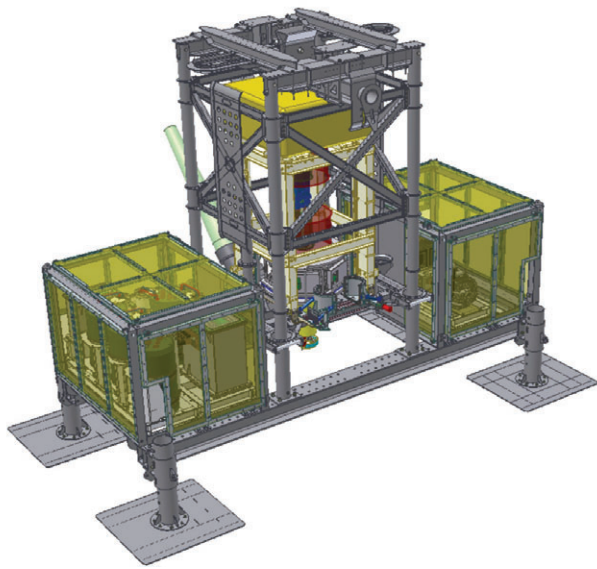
Retrofit tee design with internal hyperbaric GMA seal weld.
